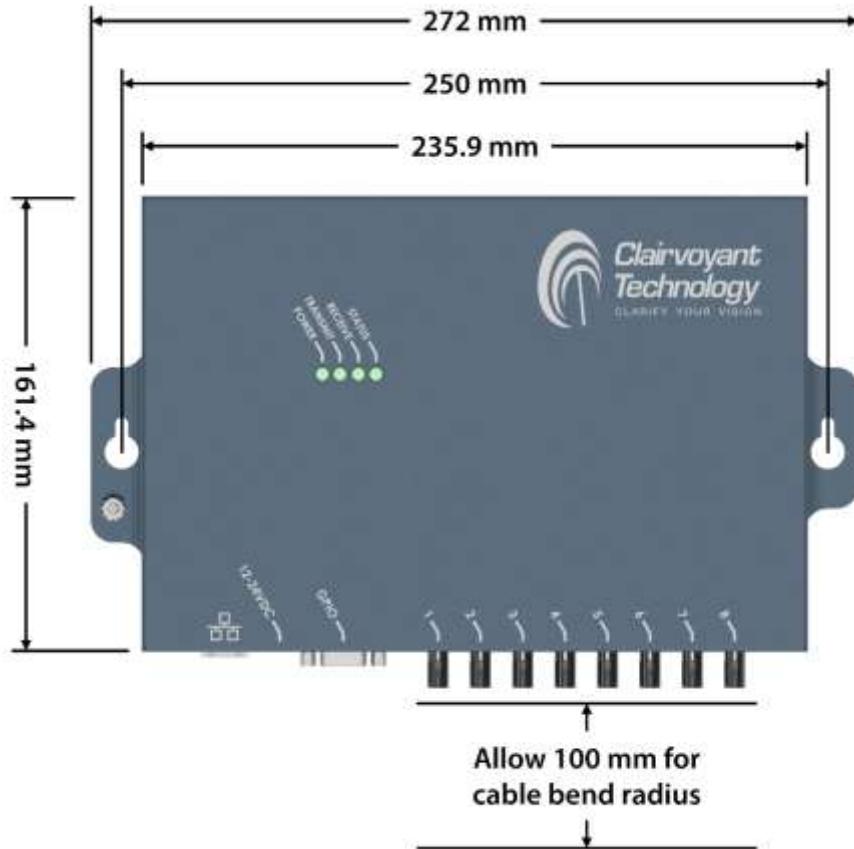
Dimensions for S1 Reader and Mounting Holes
